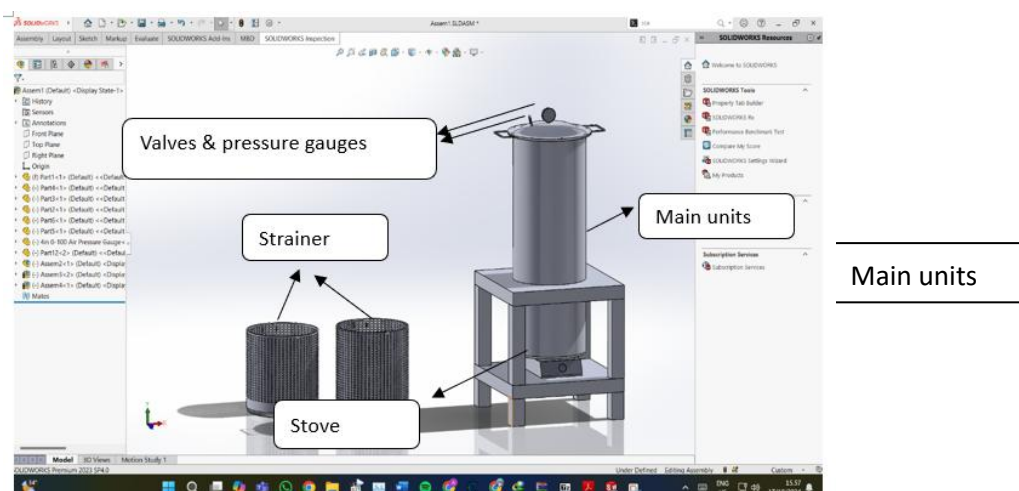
Design using 2D AutoCAD Pressure Cooker Equipment Wear Strainer
